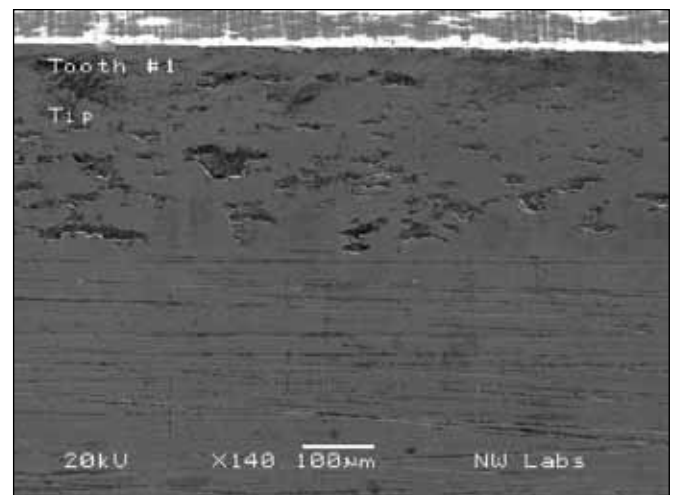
Enlarged view at tip of tooth 1 on pinion.
